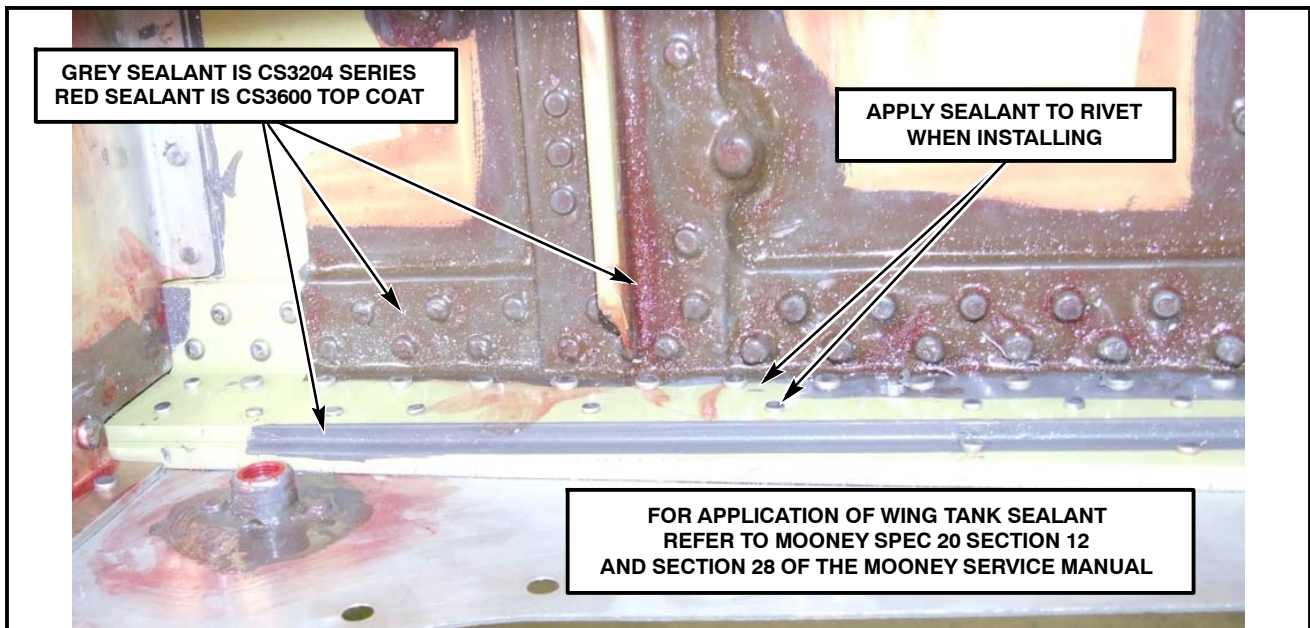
RIVET AND PANEL SEALANT
